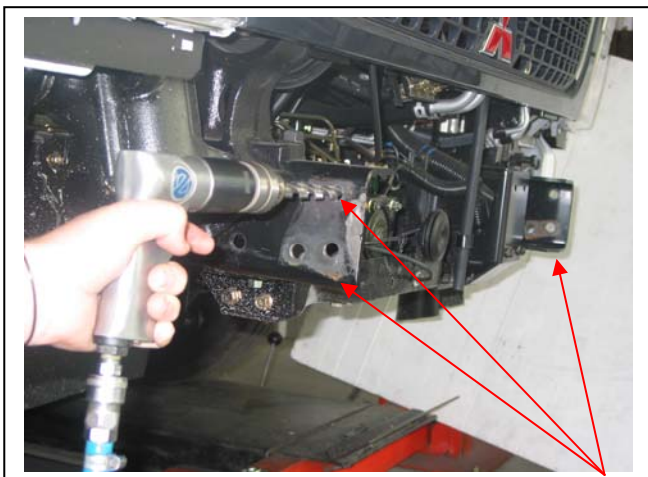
Drivers side shown Drill 13mm hole top front, one each side to underside of chassis
